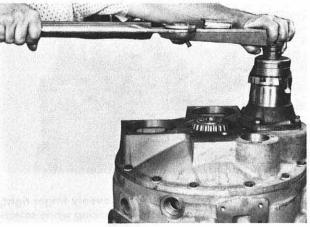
Tighten flange nut 250 to 300 ft. lbs. torque [339,0 - 406,7 N.m].
